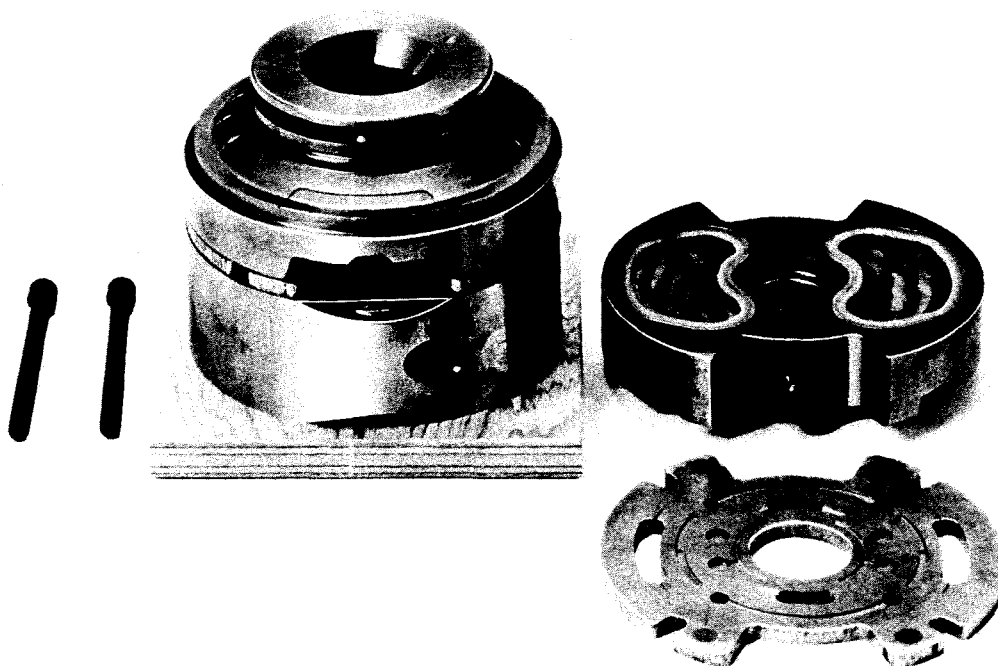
Reverse cartridge, use a piece of wood to hold ring, rotor and vanes
